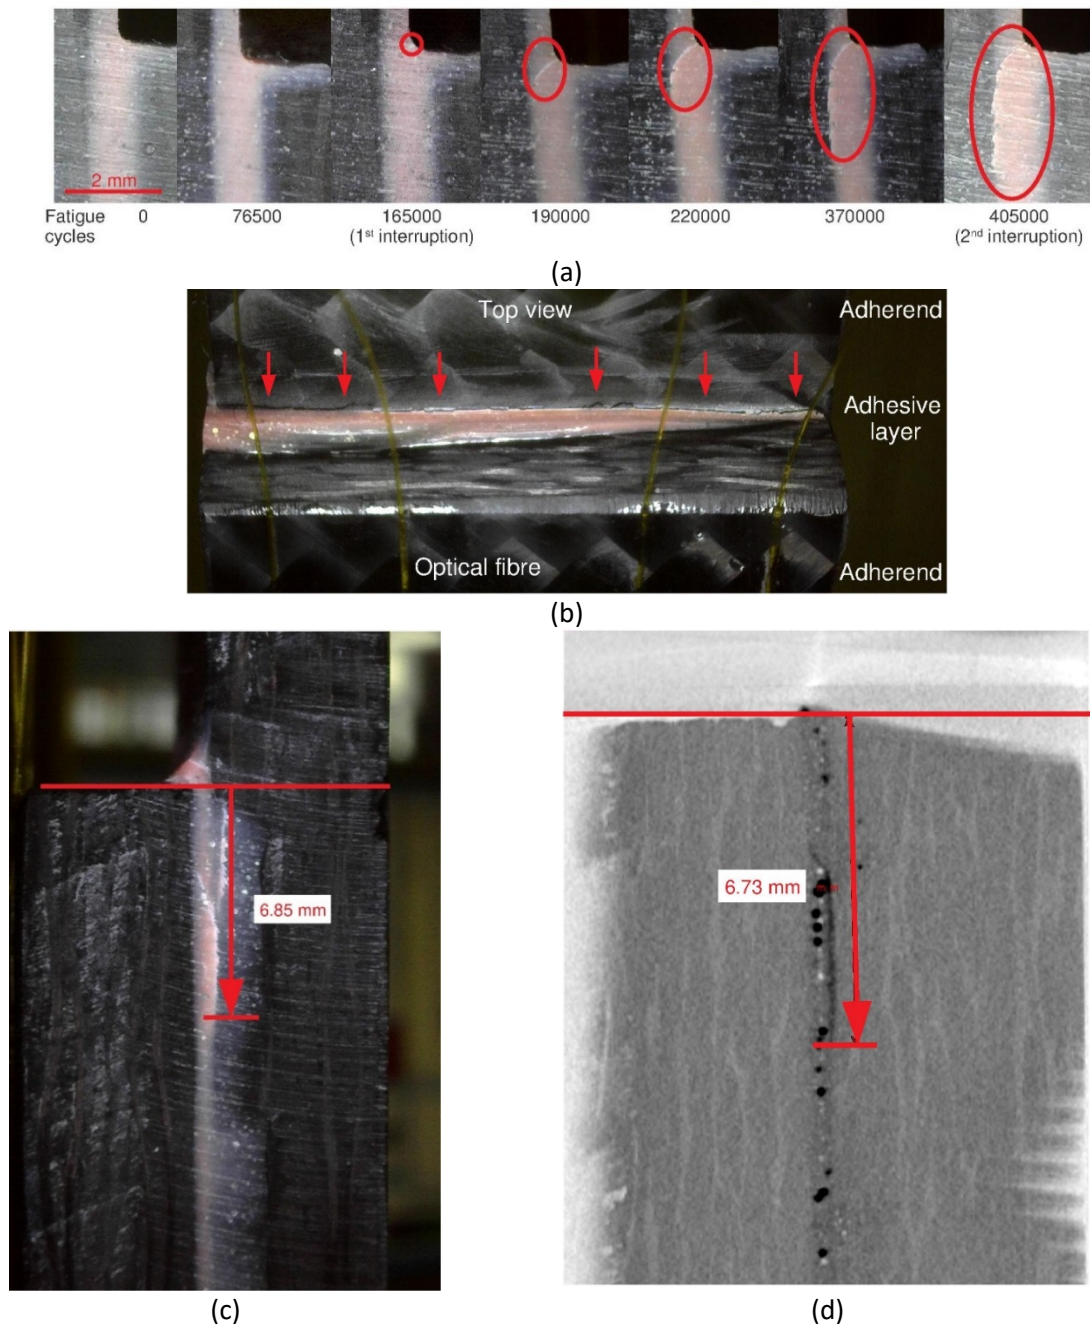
VT observations of the fatigue cracks emerging at the side surfaces of the joints (a, specimen #3), top view (b, specimen #3), measurement of the crack length (c, specimen #2 – 1st interruption) and measurement of the same crack length by μ CT (d, specimen #2 – 1st interruption)
